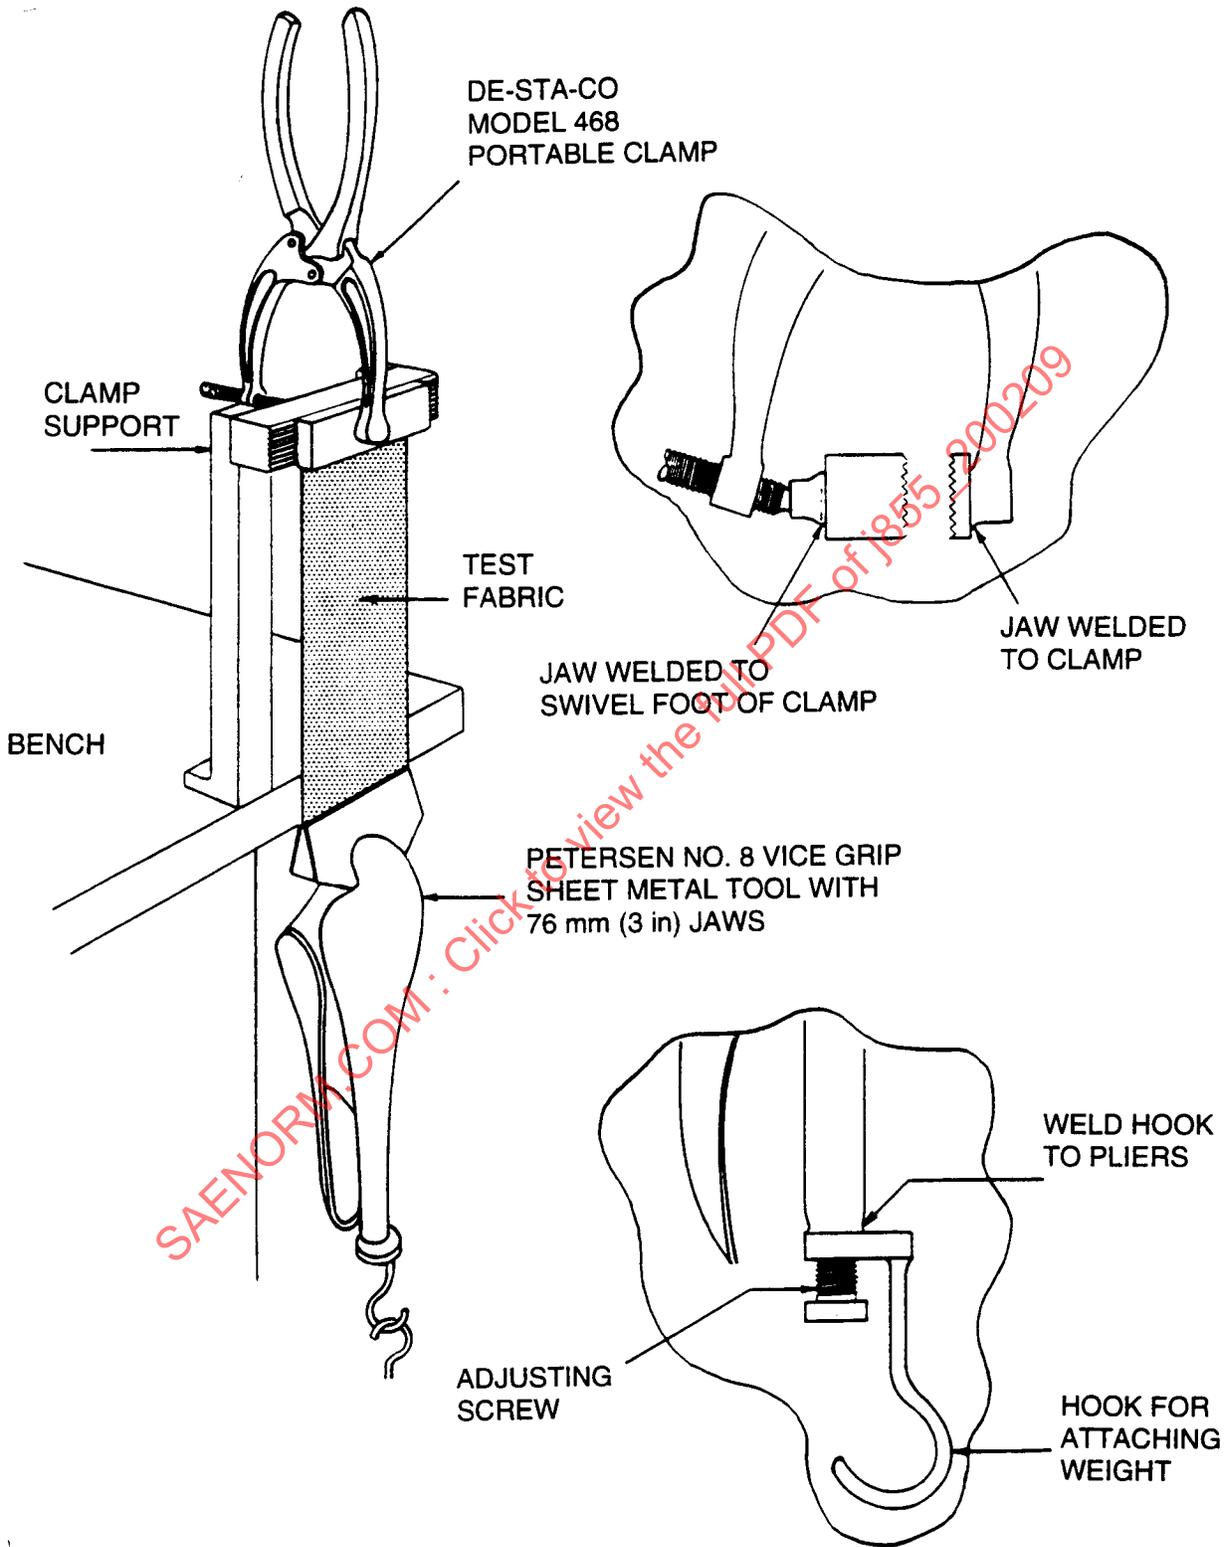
CLAMP AND FIXTURE ASSEMBLY FOR STRETCH AND SET OF TEXTILES
